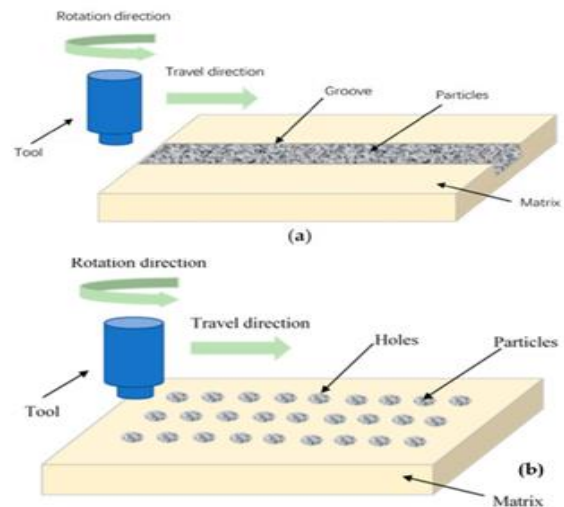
Adding Particle Methods of Fabricating the Surface Composites: (A) Groove; (B) Holes (Li. Et. Al.)
